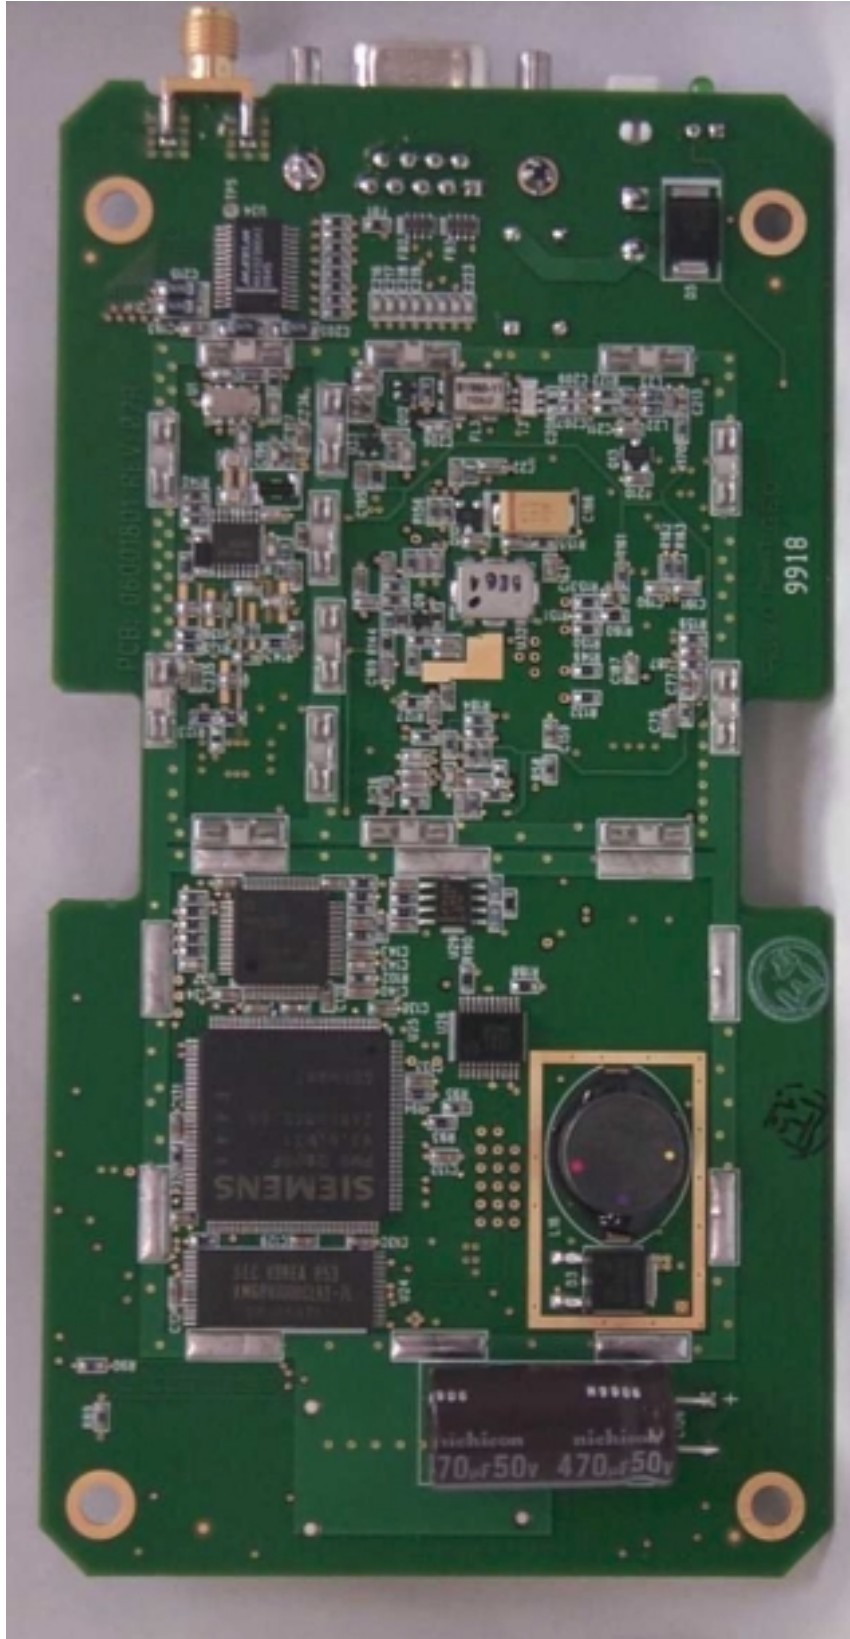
Bottom of DTSA PCB with RF shields covering radio circuitry removed.
